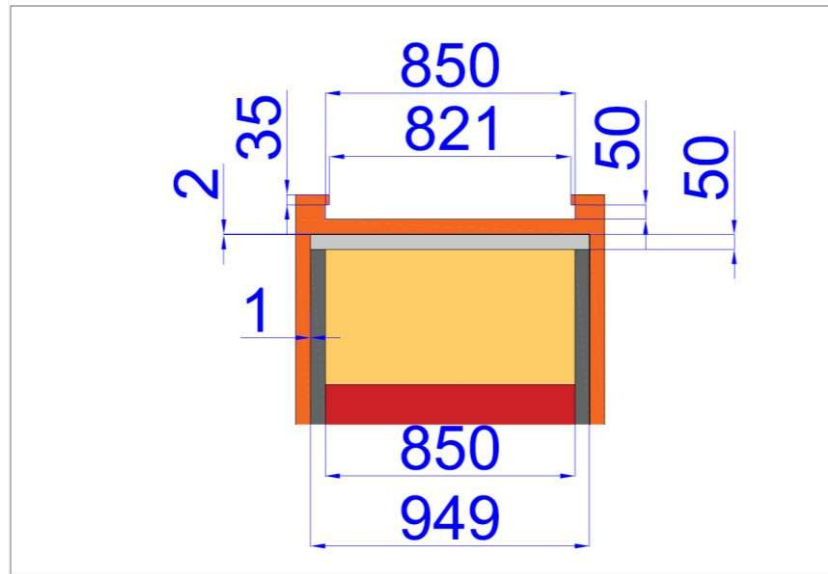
Dimensions of the copper canister and cast insert details in millimetres.
